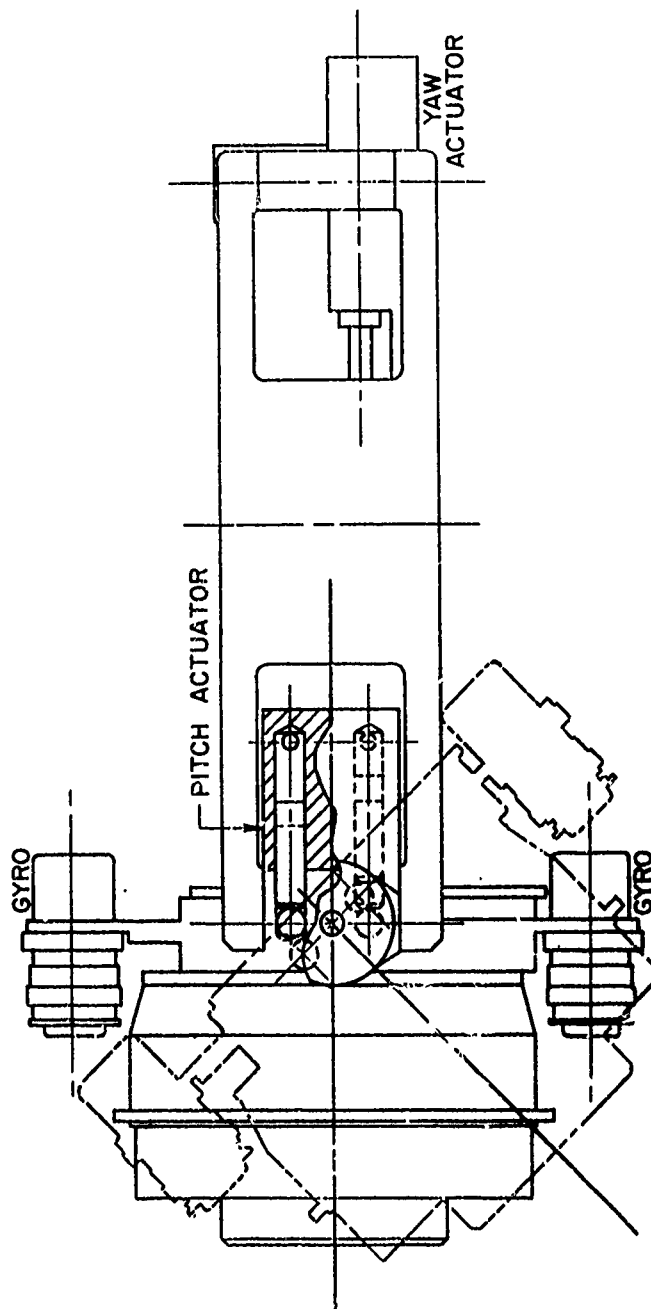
Schematic Drawing of Tracking Telescope and Gimbal System, (Pitch Plane)
